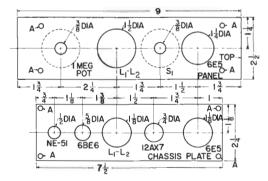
PANEL AND CHASSIS PARTS LAYOUT used for this model. Small holes for socket and terminal strip hardware are not shown and should be located from those parts.
